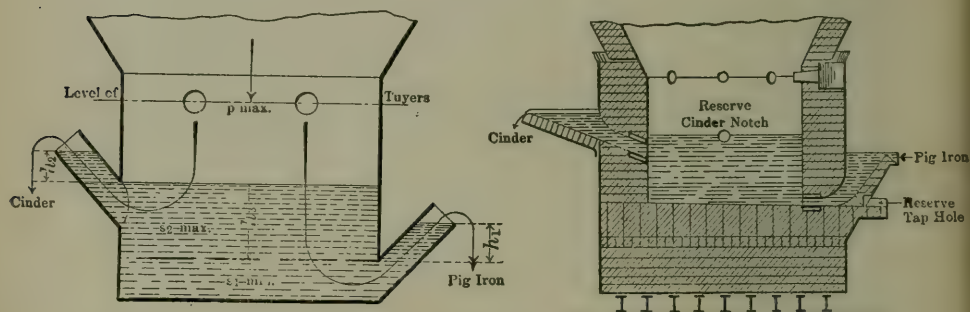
Arrangement for Continuous Flow. Fig. 2. To Pig Casting Machine
